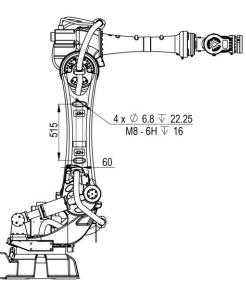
Cable fixed position of jib of AIR165-2750A manipulator
